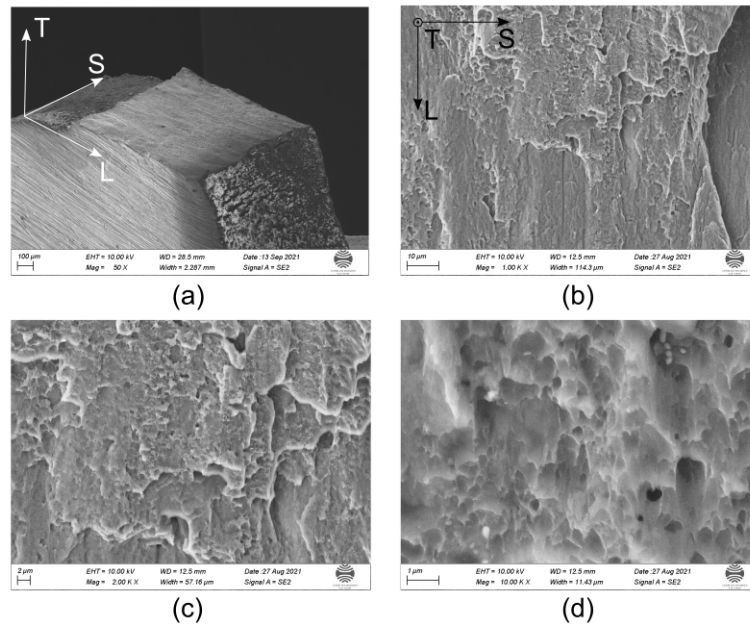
Fractography via scanning electron microscopy (SEM) of 2198T3R under shear-only (SO): (a) Macroscopic smooth fracture surface, (b)(c) Flat fracture surface and (d) Elongated ductile dimple cluster that initiated on the dispersoids.
